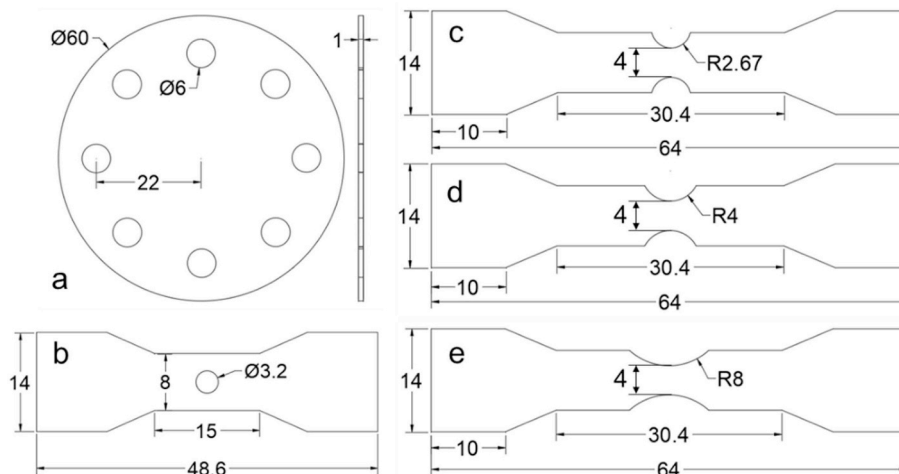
Schematics of the flat fracture specimens tested. (a) Equibiaxial tension punch, (b) 1.5 mm thick central hole, and 1.5 mm thick notched tension specimens with cutout radii of (c) 2.67 mm, (d) 4 mm, and (e) 8 mm. All dimensions in mm.
